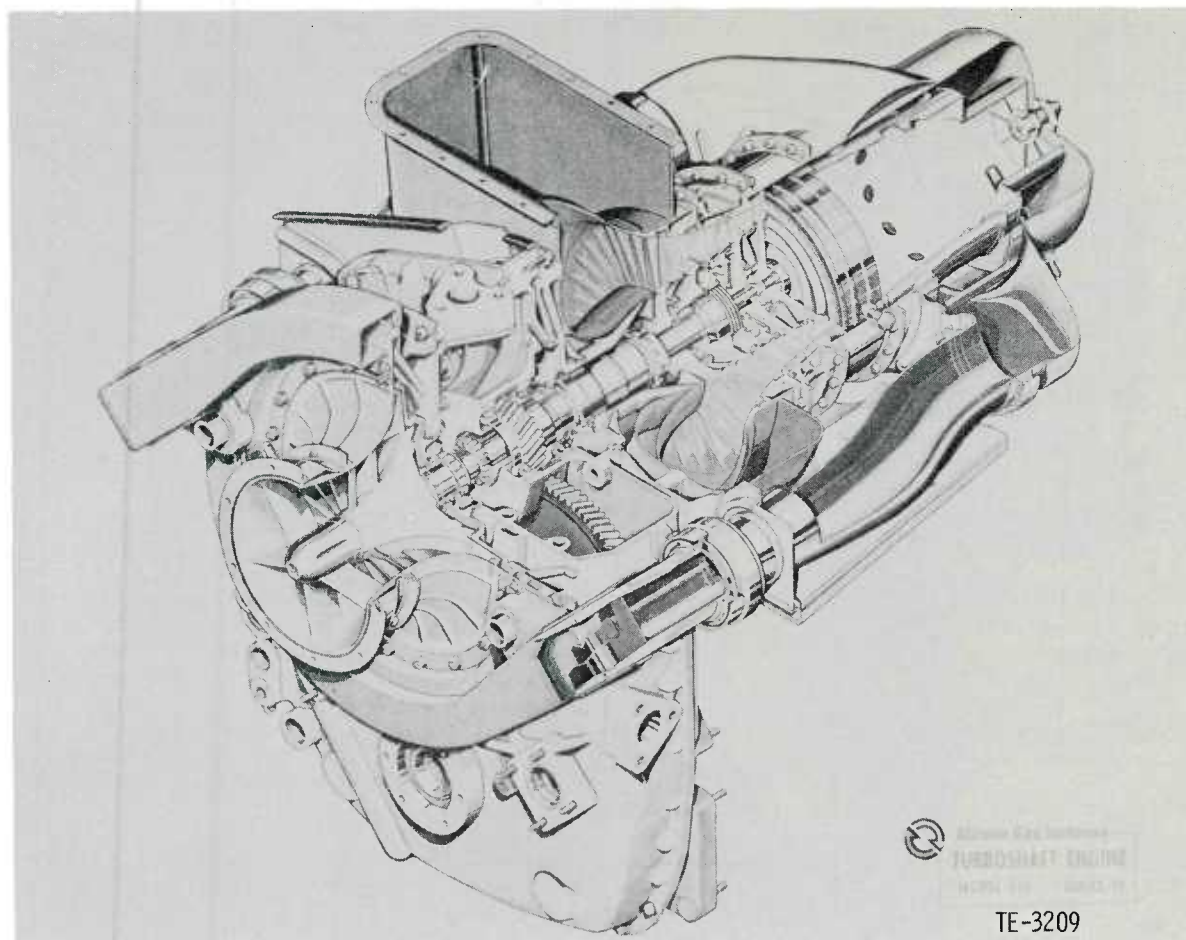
Cutaway of the 250-C30 turboshaft engine.
